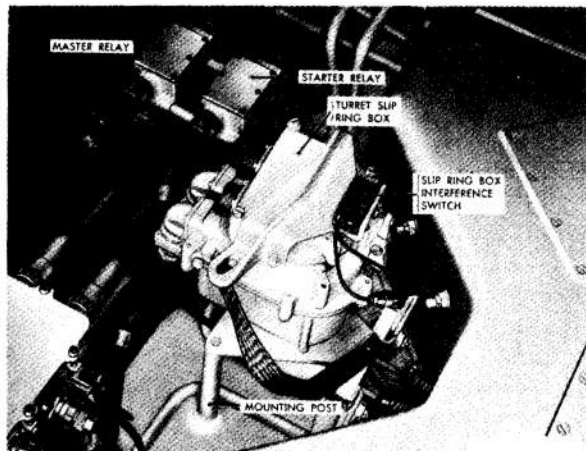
Turret Slipring Box—Installed View With Turret Platform Removed
